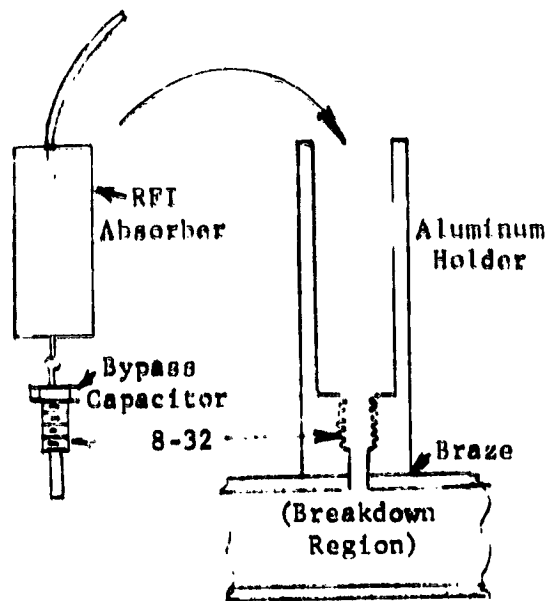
Multipactor Breakdown Probe and Holder Cross Sections
